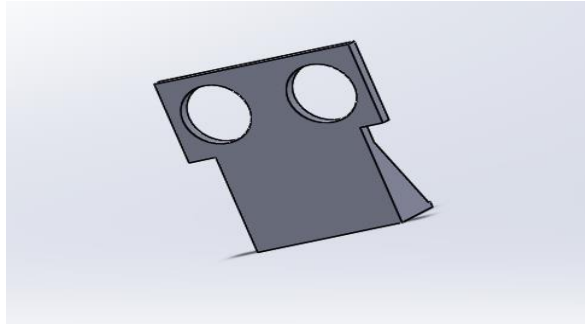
Solidworks Drawing of the ultrasonic sensor holder
